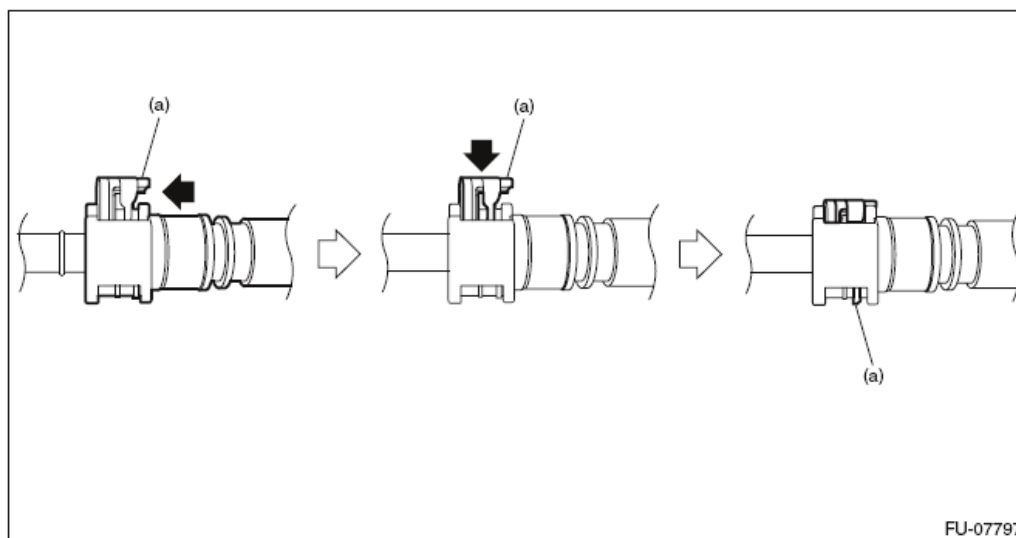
Locating Fuel Delivery Tube Evaporation Hose
